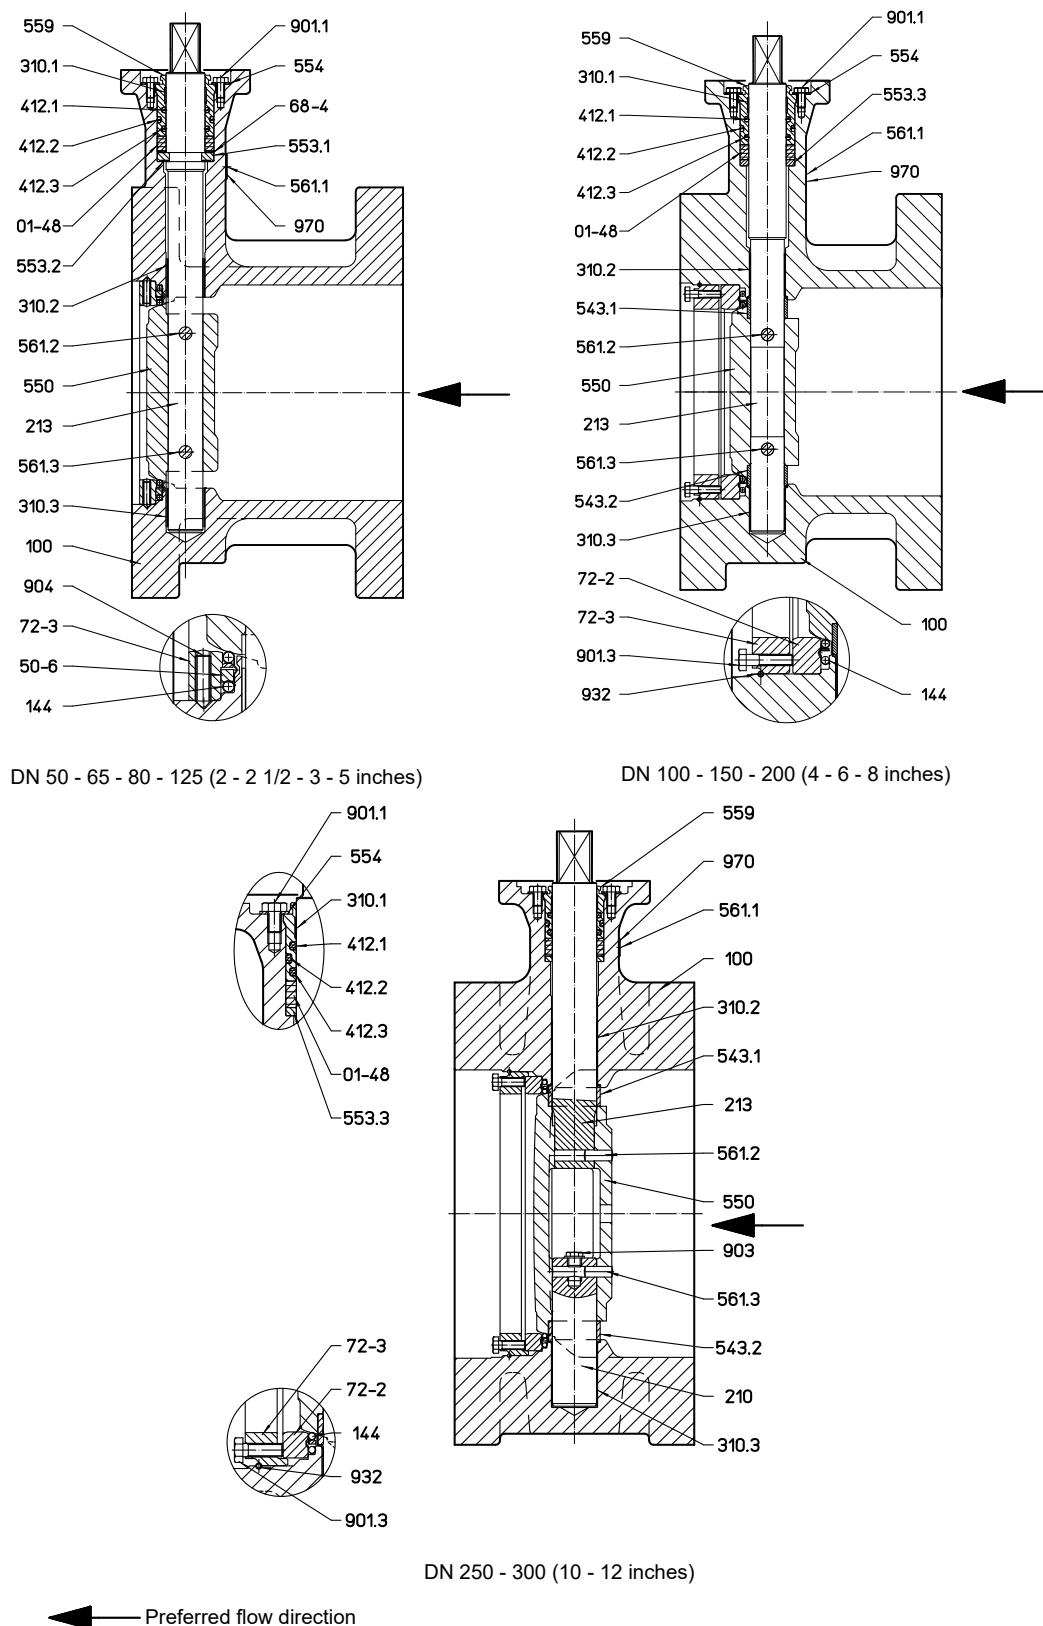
Sectional drawing of DANAİS MT II DN 50 - 300 (2 - 12 inches) / flanged body (T7) / metal design
